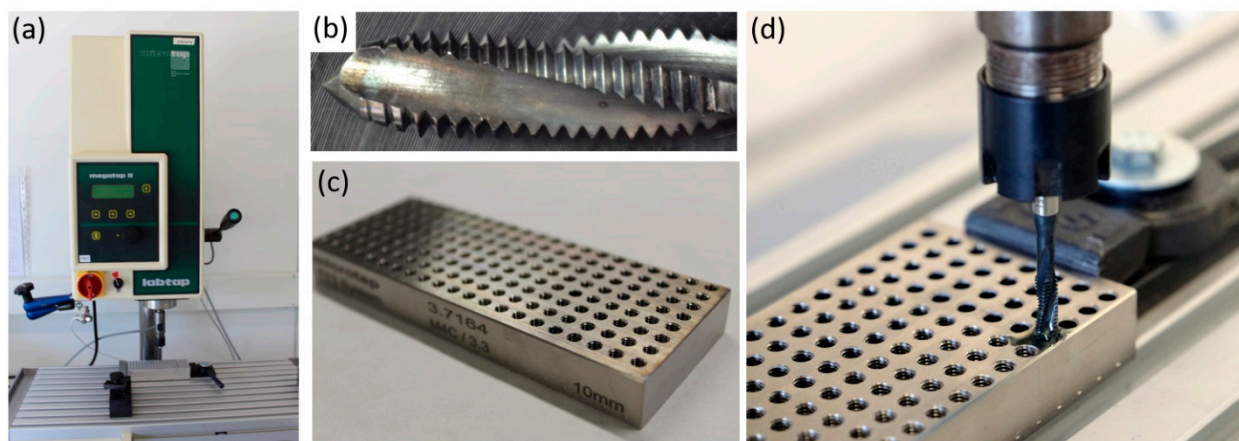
The experimental setup to study the lubricity performance using the Labtap G8: (a) Labtap G8 equipment, (b) TTT_M4C coated tool, (c) Ti6Al4V workpiece and, (d) cutting process.
